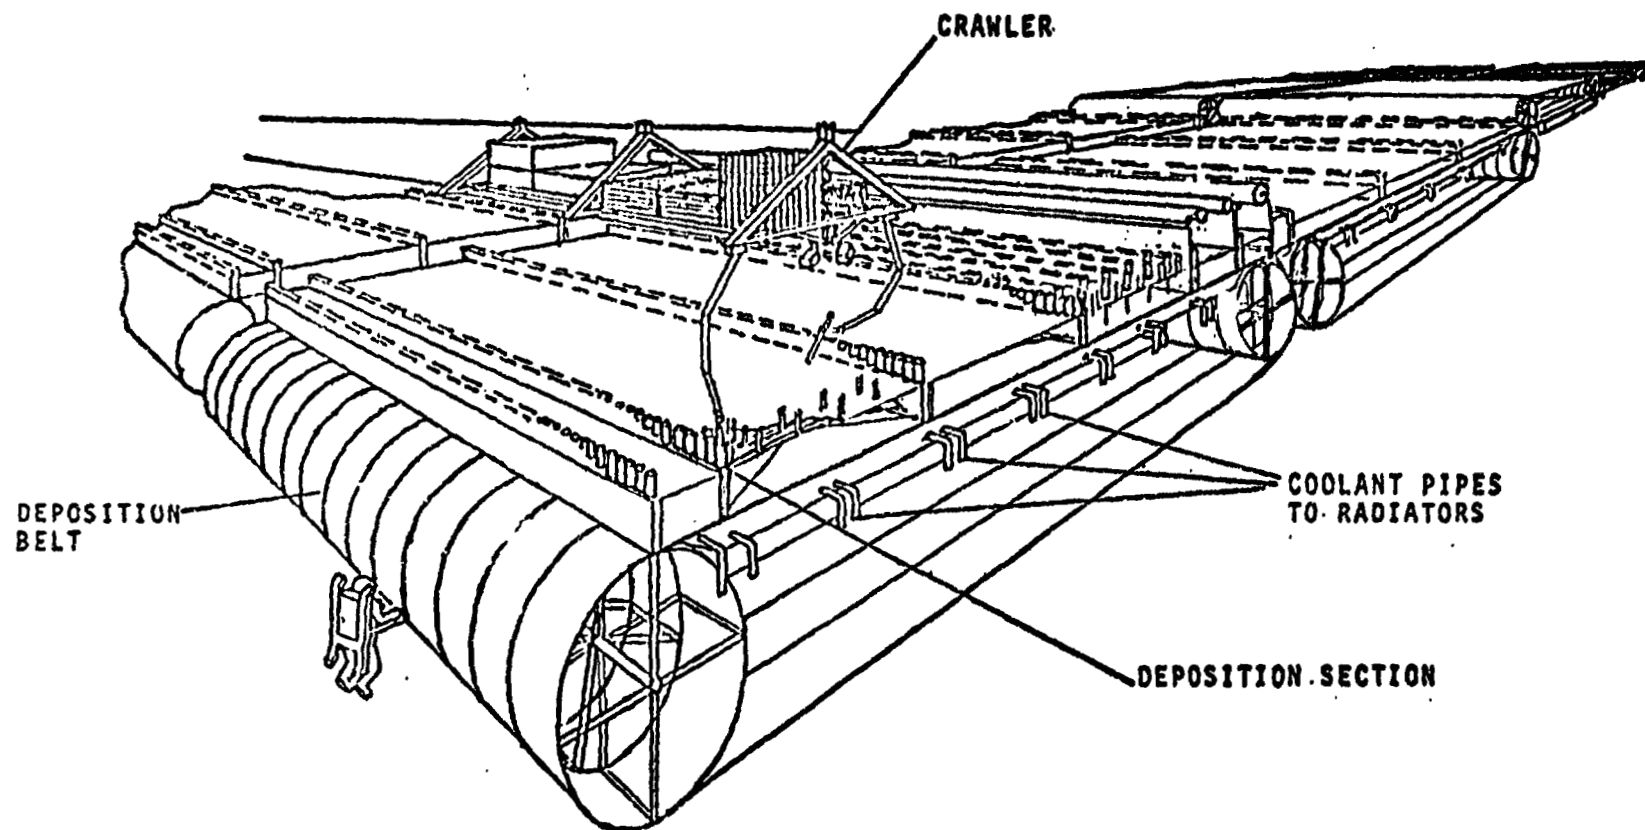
SOLAR CELL DEPOSITION AND ASSEMBLY: PERSPECTIVE VIEW
